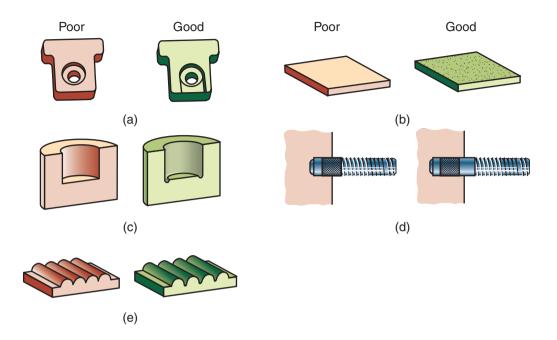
Examples of undesirable (poor) and desirable (good) casting designs.
